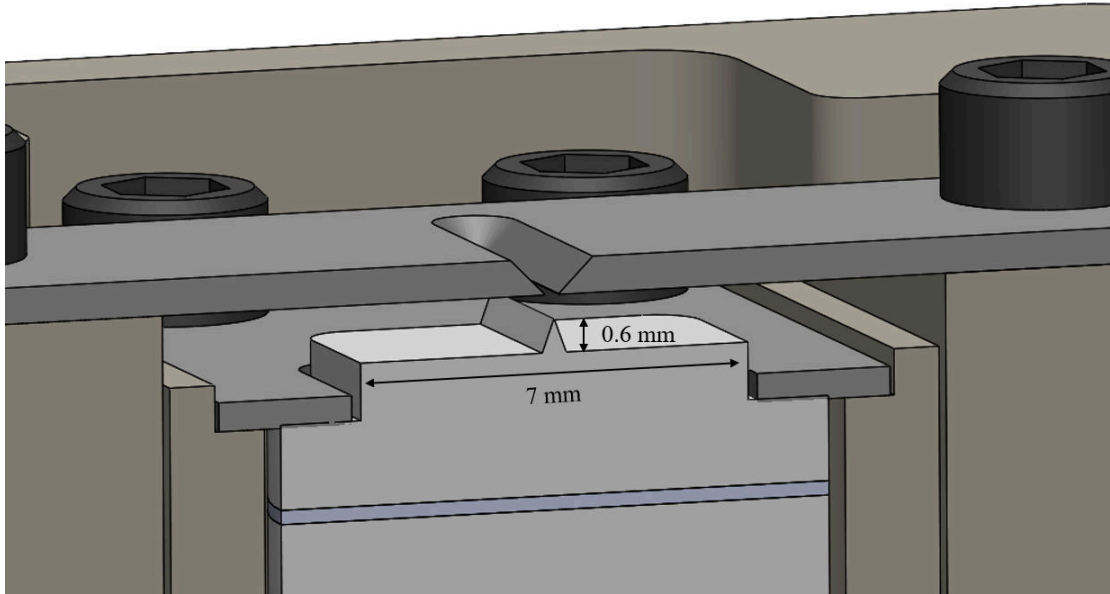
Magnified section view of the simple linear emitter wedge assembly.
